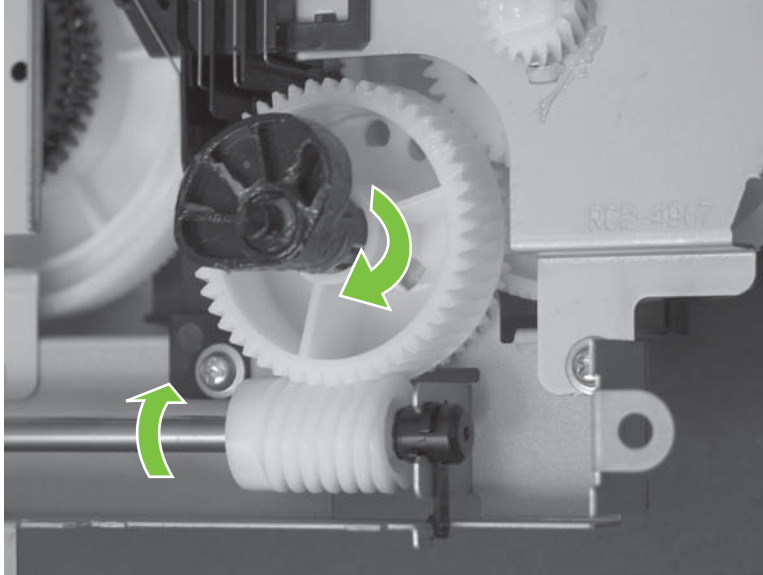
Reinstall the main-drive assembly (2 of 11)
